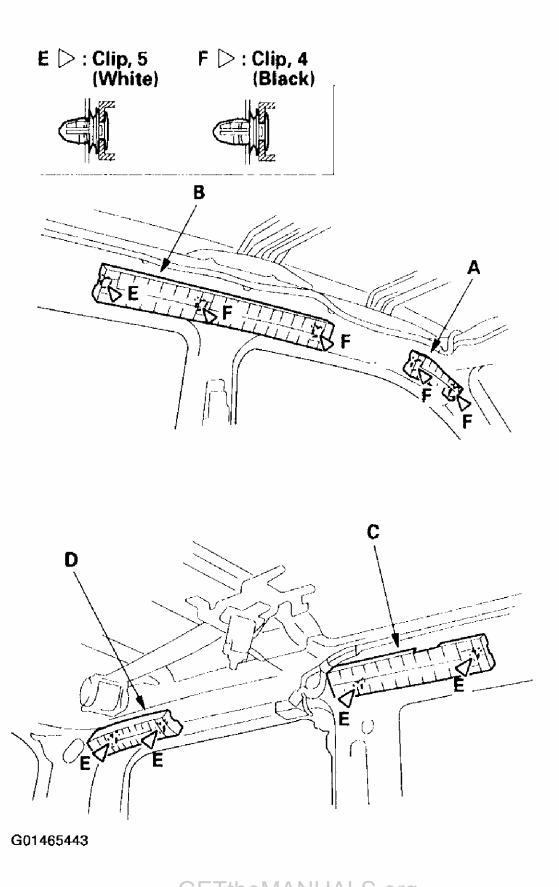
Identifying Headliner Fastener Locations (8 Of 8)
